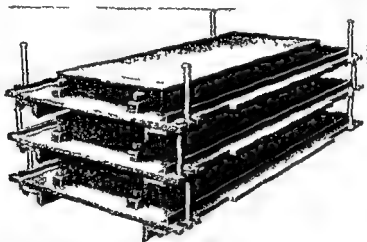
Press box assembly for use in box press. (Courtesy The French Oil Mill Machinery Co.)
